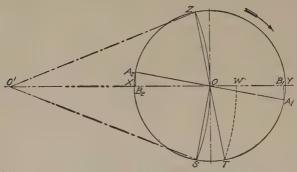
Crank and Eccentric Diagram for Engine Shown in Fig. 17
